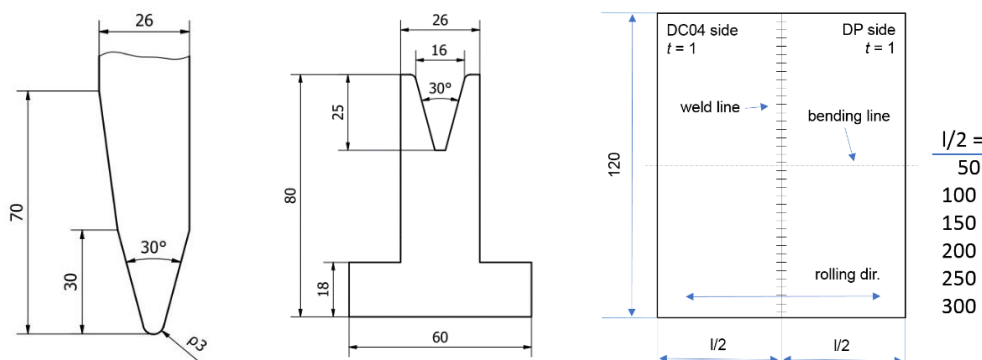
Schematic view of the applied bending tools and the initial blank, indicated the rolling-, the bending-, and the welding directions.
